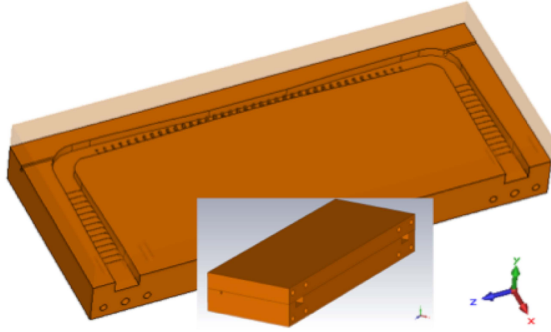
Pillar layout and channel tapering in the linear coupler DCW TWT. Inset: assembled structure with its WR-28 waveguide flanges and hole for electron beam injection/extraction.
